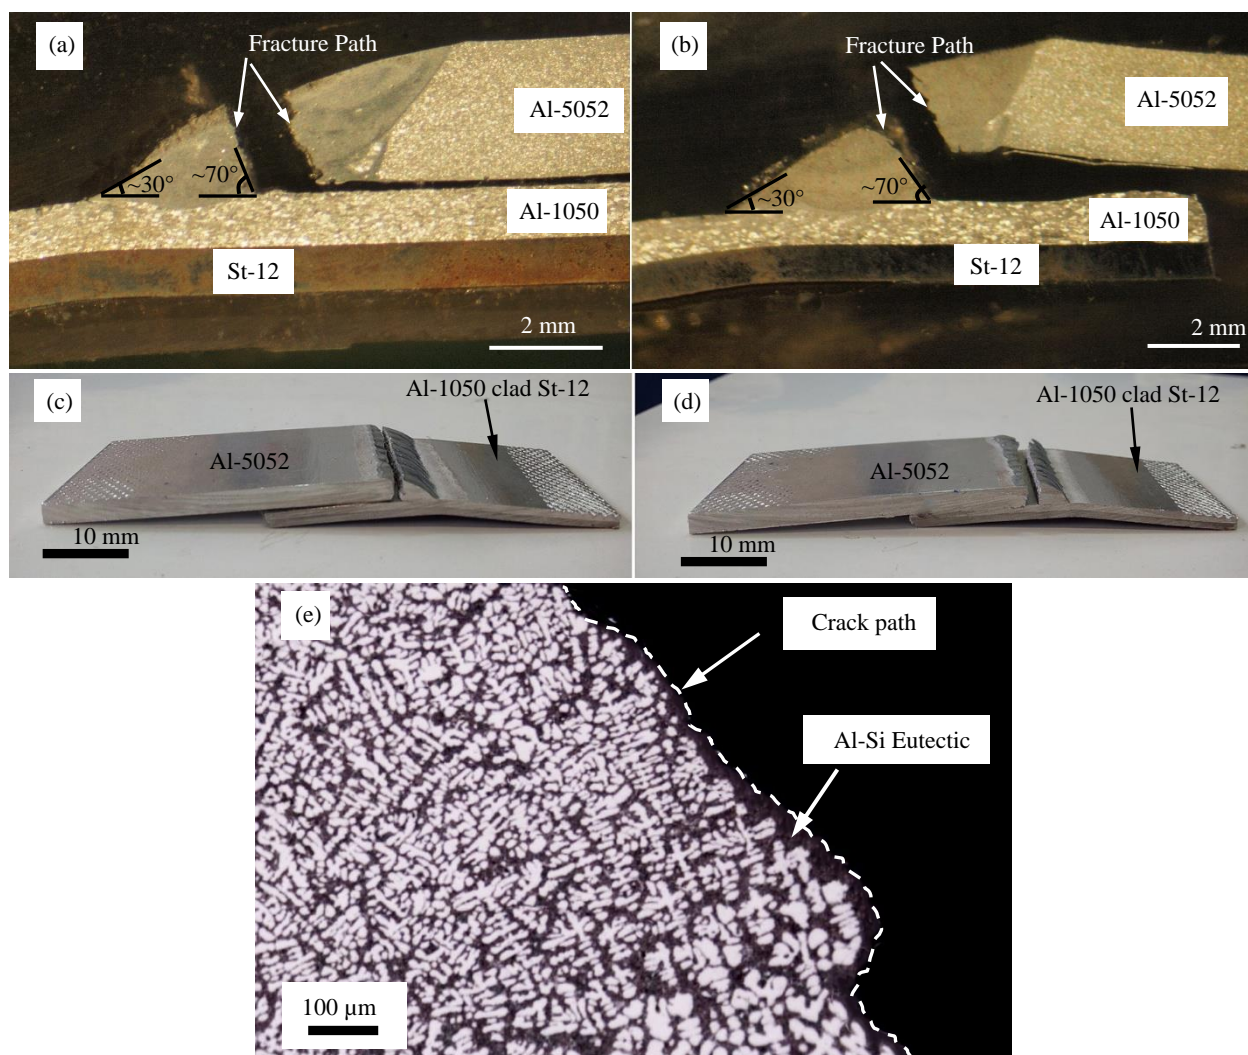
Fracture path during shear-tensile test for the sample with the welding current of (a) 80 A and (b) 120 A. Stereograph from the sample after shear-tensile test with the welding current of (c) 80 A and (d) 120 A. (e) Microscopic image from crack propagation through Al-Si eutectics
